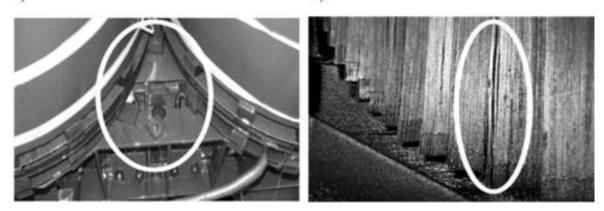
Pictures from an internal inspection of a transformer active part(a) Fallen out distance inserts of windings. (b) Slackened core sheets (Borucki, 2012)
